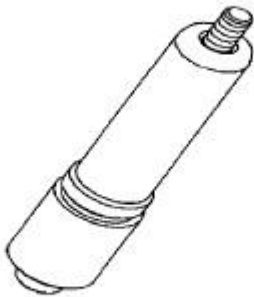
CRANKSHAFT LOCKING TOOL - VM.9992
